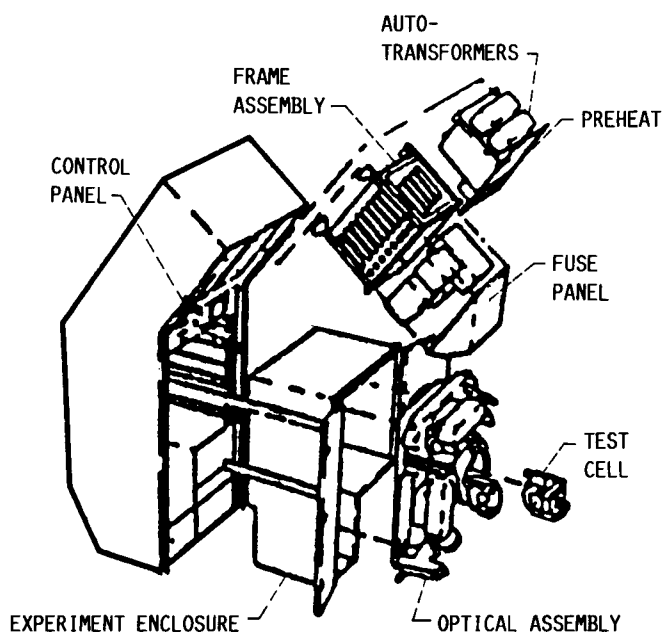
FLUID EXPERIMENT SYSTEM RACK ASSEMBLY.
